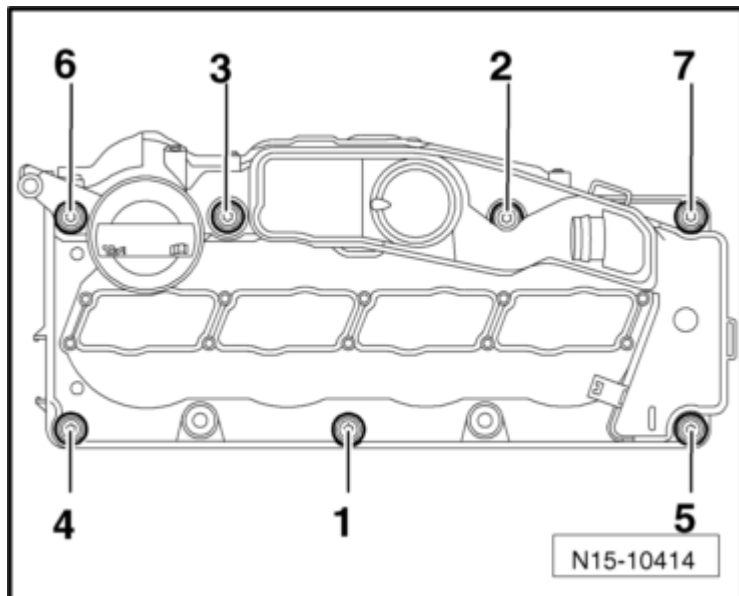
Identifying Head Cover Bolts -1 Through 7- Tightening Sequence
